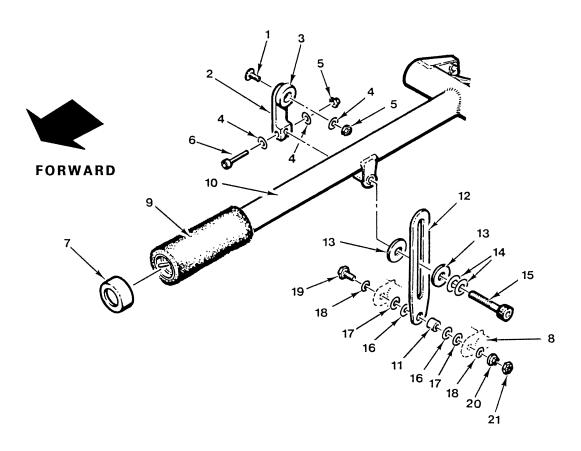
COLLECTIVE FRICTION ASSEMBLY
